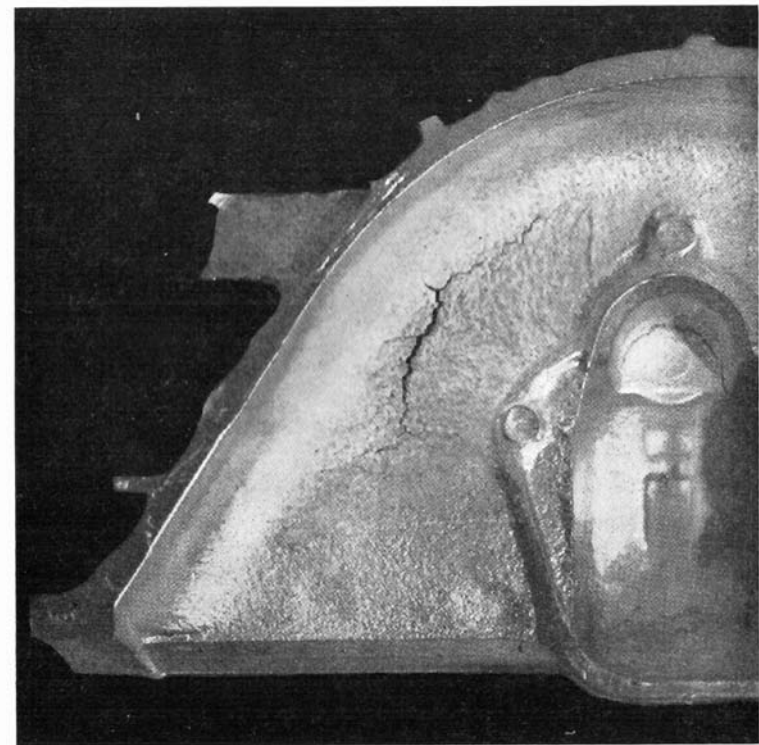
A contraction crack formed in an aluminium alloy die casting during cooling in the mould after solidification was complete.
